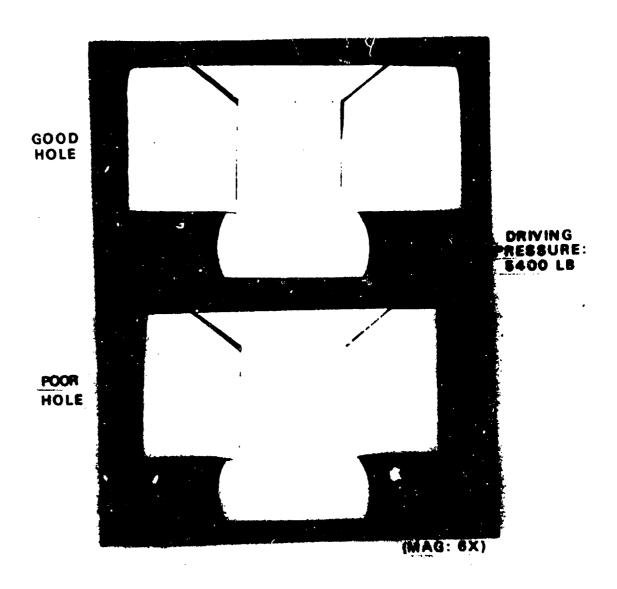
Photomacrographs of Sectioned 3/16-in. Diameter (D) 7050-T7X Rivets Driven With 1.5D Flat Heads in 0.281-in. 7075-T651 Plate 2nd Step of Aging: 8 Hrs. at 355°F
